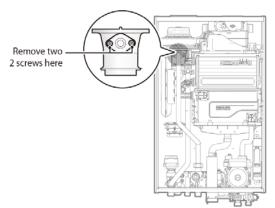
Access to Gas Orifice in Fan Assembly (NCB-24/28/34LSWE)
